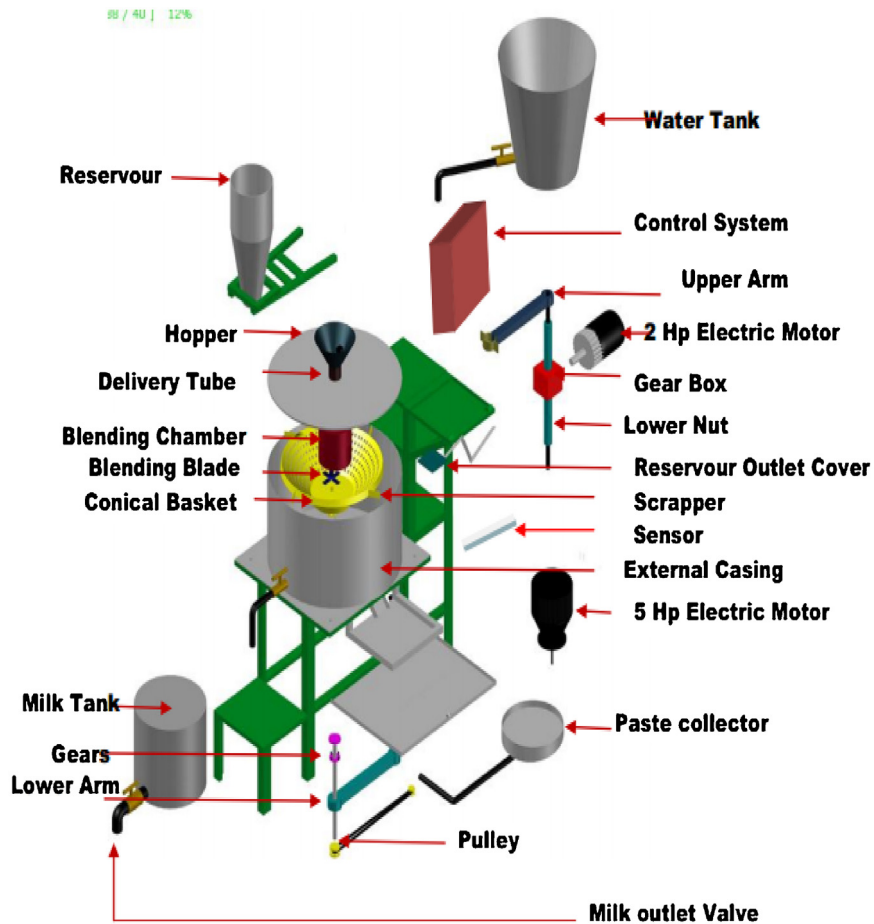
Exploded view of the automated grain drinks processing machine.
